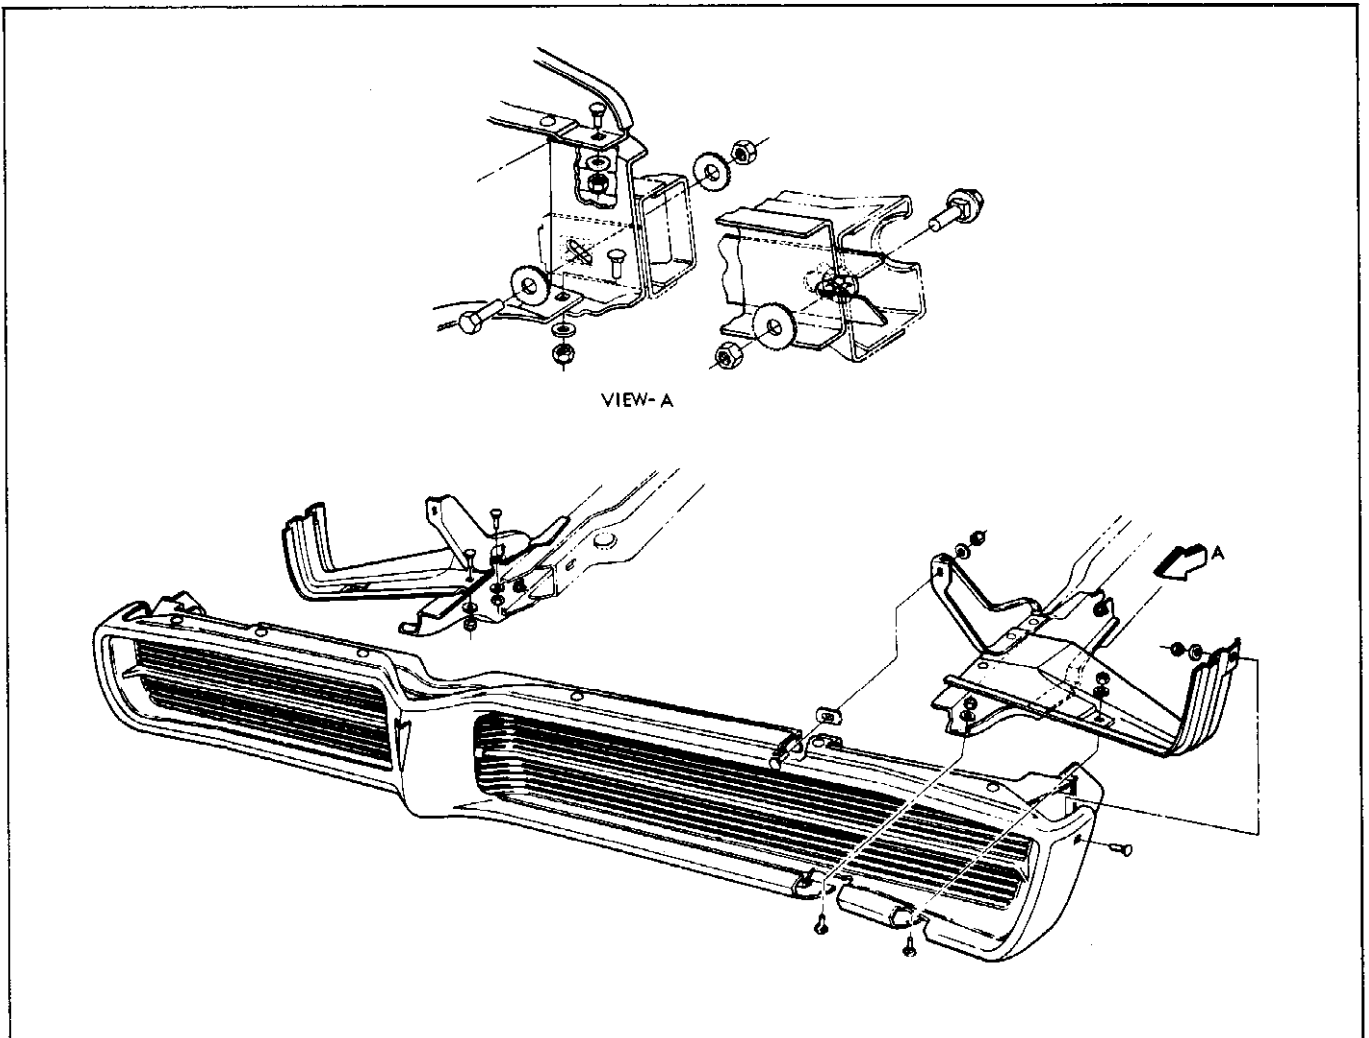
Front Bumper Assembly (Pontiac exc. GP)
